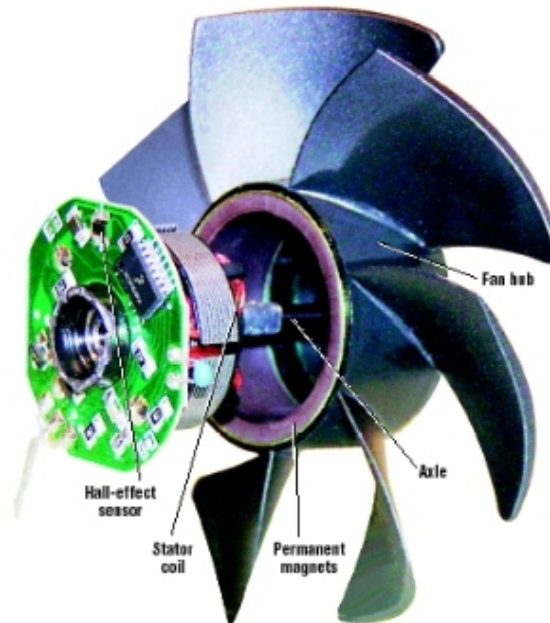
PM brushless motor fan: two-phase inner stator with four concentrated coils, outer rotor with ring-shaped PM. Control electronics is mounted on the stator.
